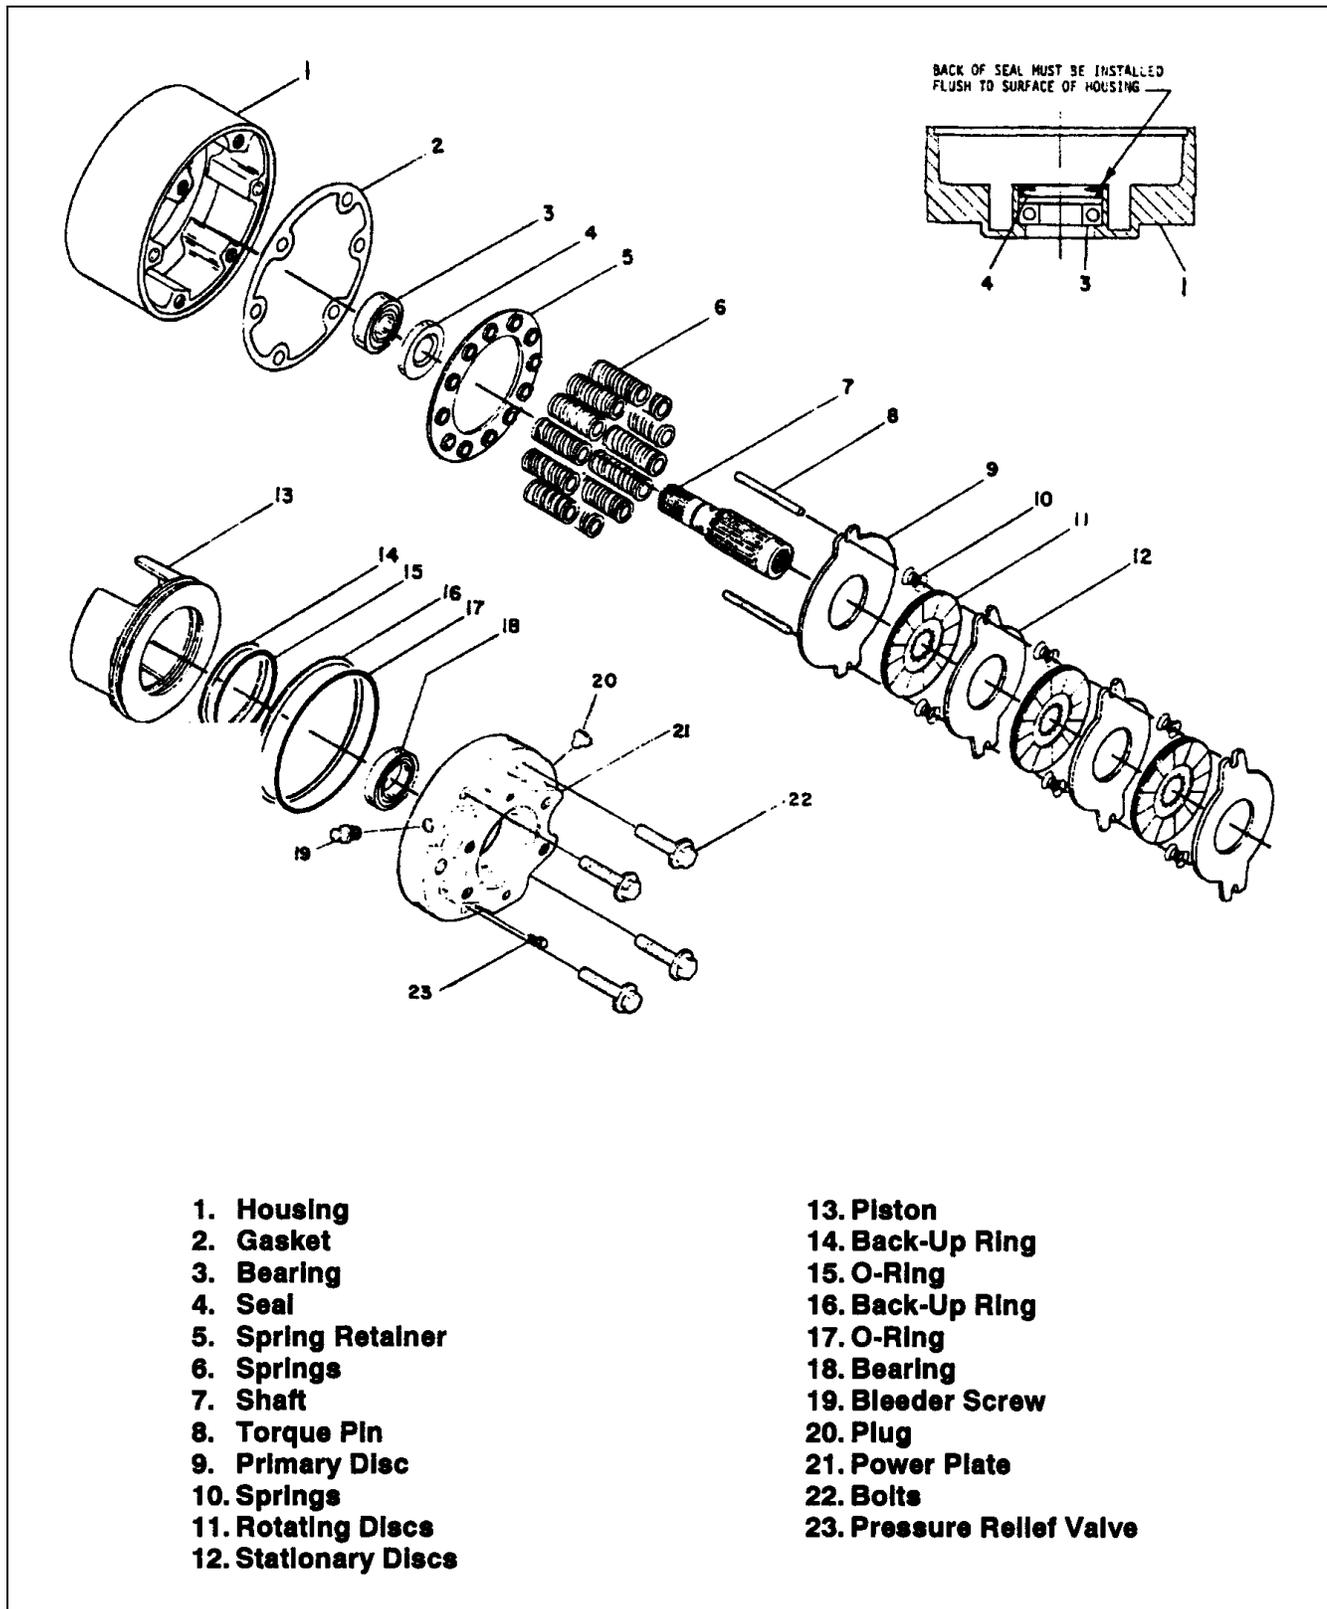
Swing Brake Assembly - Ausco (Machines Built Prior to May 1992).
